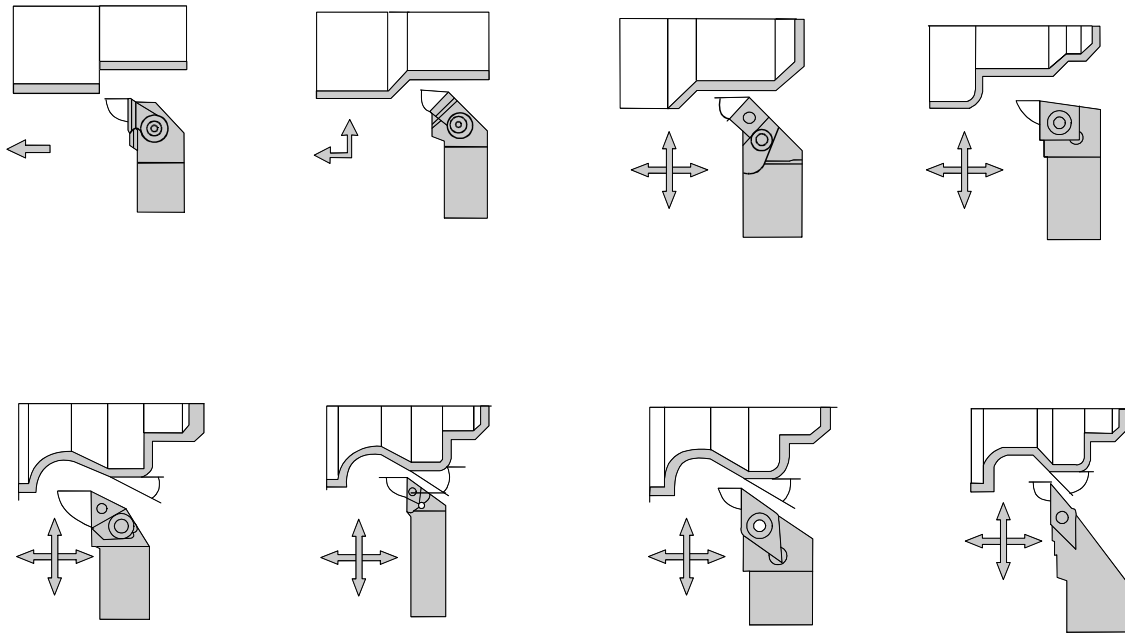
The typical contour capability of external turning tools (Courtesy Seco Tools, Germany. Redrawn from Seco Catalogue)
